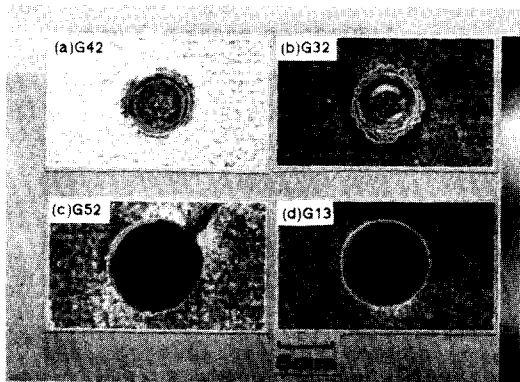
Mechanical c-scan image of spot welds (galvanized steel)
